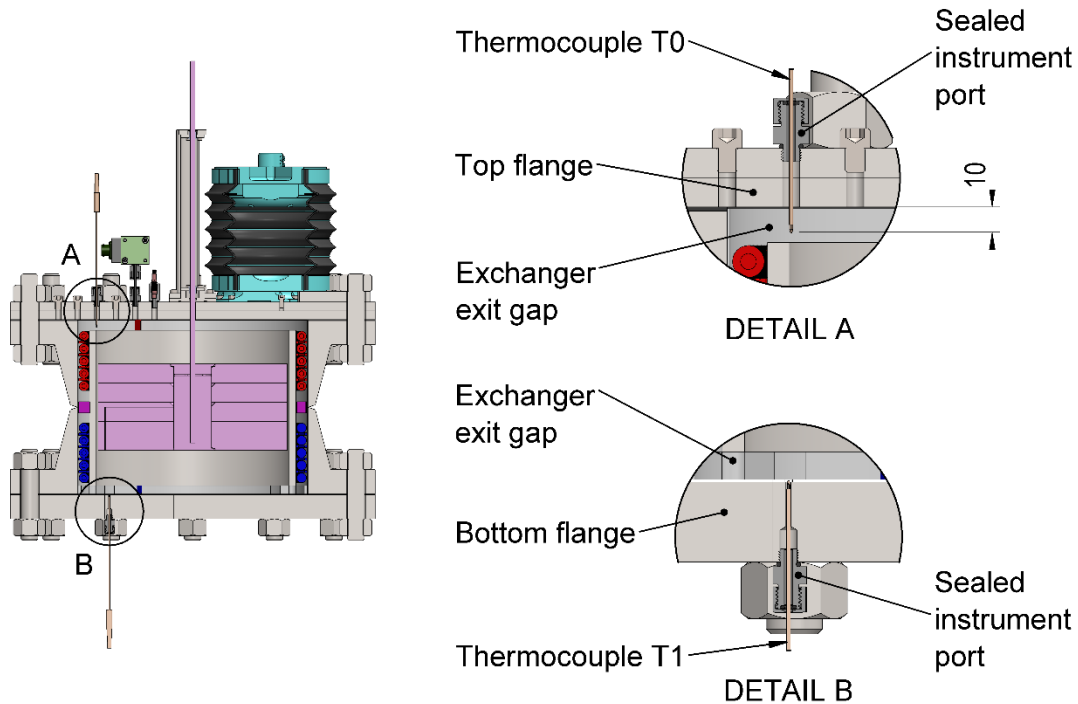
Section view engine body showing the location of the expansion space thermocouple T0 and compression space thermocouple T1
